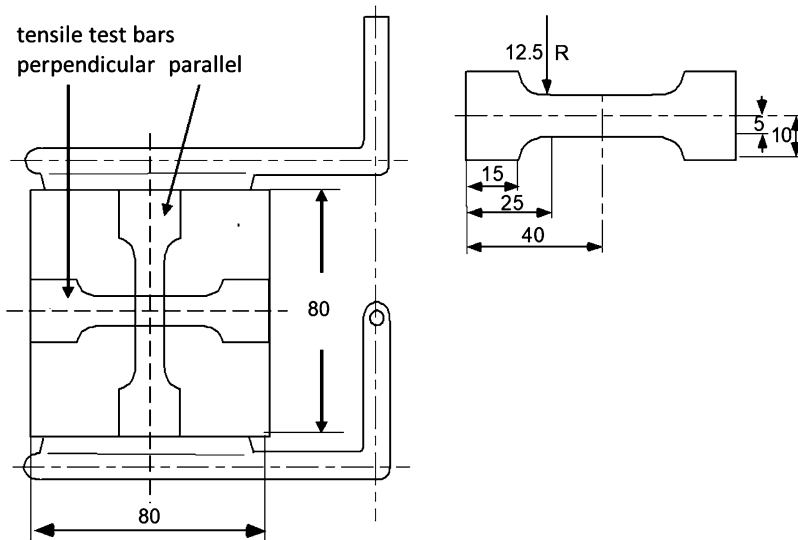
Geometry of the injection molded rectangular plates having dimensions $80 \times 80 \times 2.5 \text{ mm}^3$ (left) and the tensile test bars (right)
